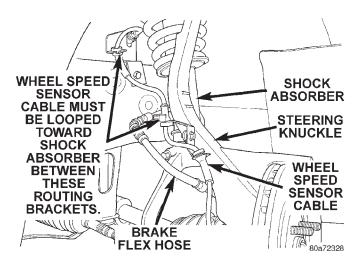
Correct Front Wheel Speed Sensor Cable Routing
